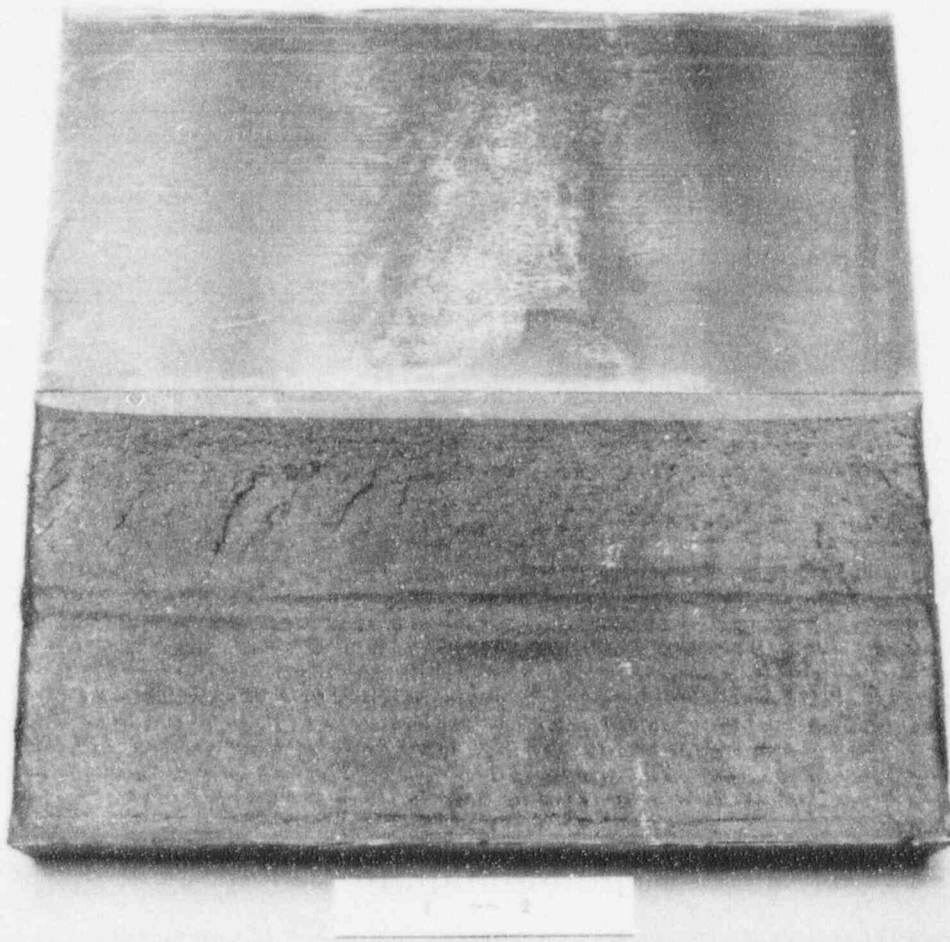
Fracture surface of full-thickness clad beam specimen CB-1
